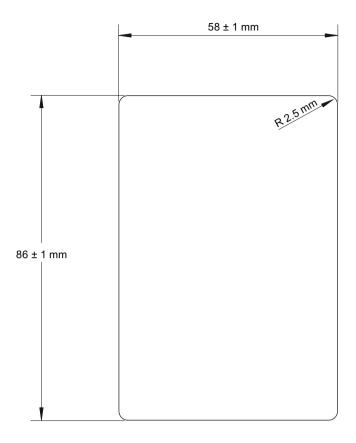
Fitting Operator Panel DMK (thread-forming screws)
